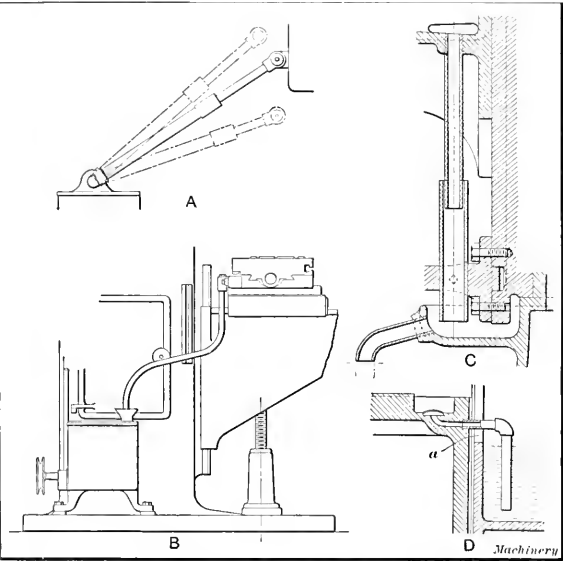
Drainage Connections to permit Vertical Adjustment of Work Table
